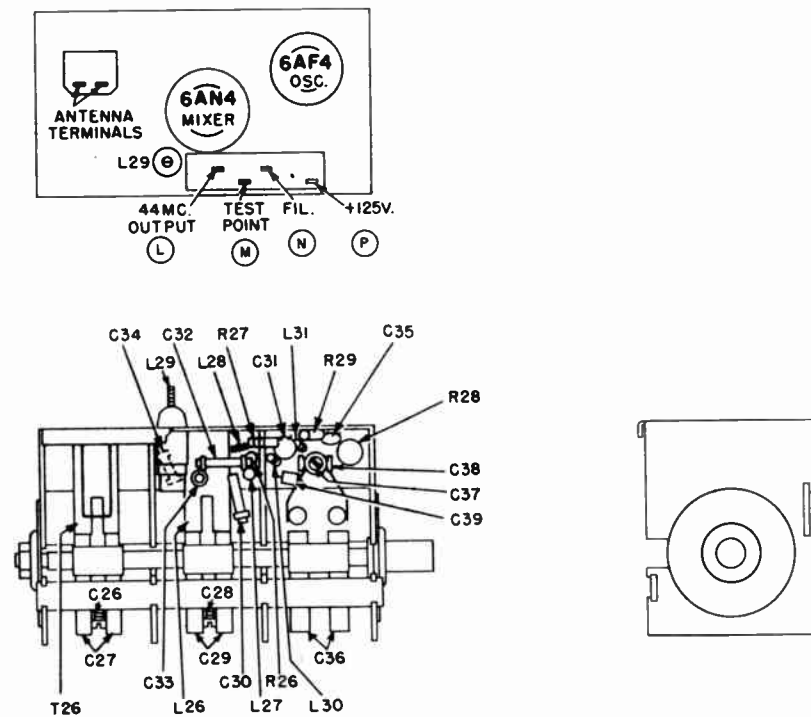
UHF TUNER PARTS LAYOUT 1-510-2
